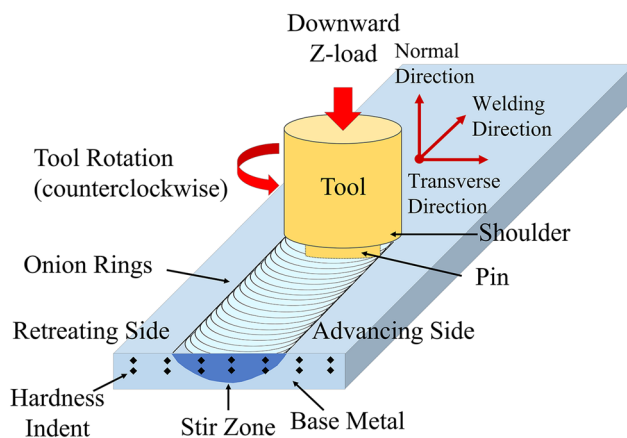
Schematic illustration of bead-on-plate friction stir welding.
